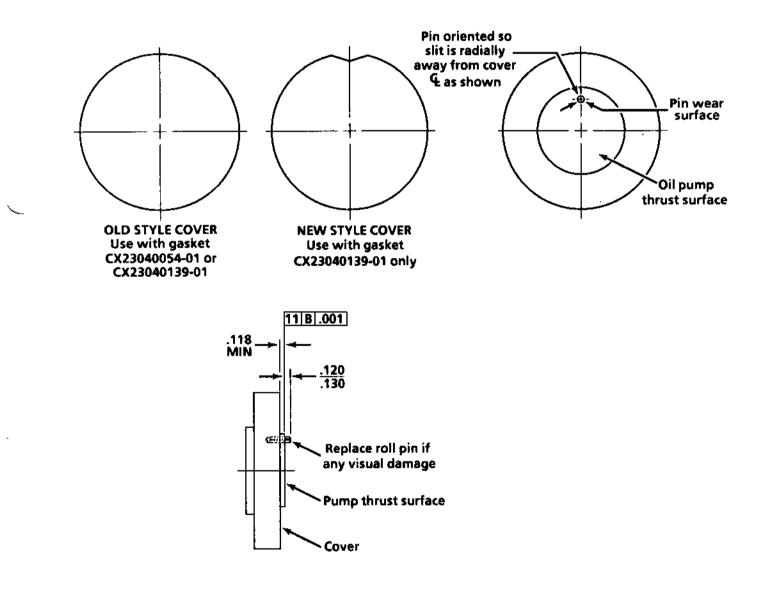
Checking Cover Plate and Roll Pin for Wear
